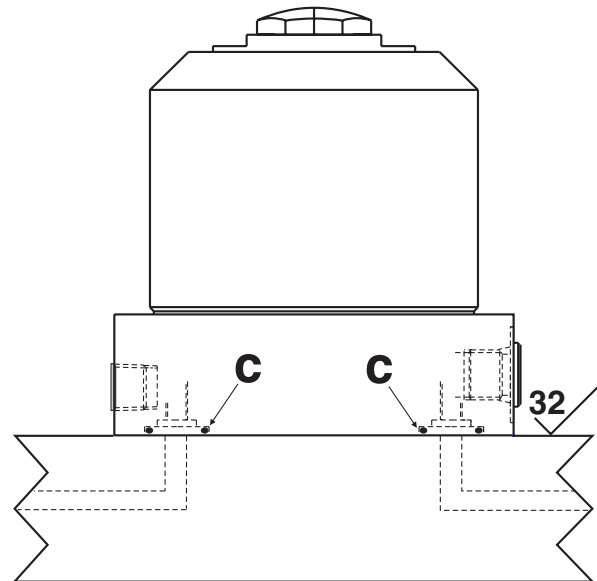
"Air Purge" / "Air Spring" Work Support using Manifold Breather Port
